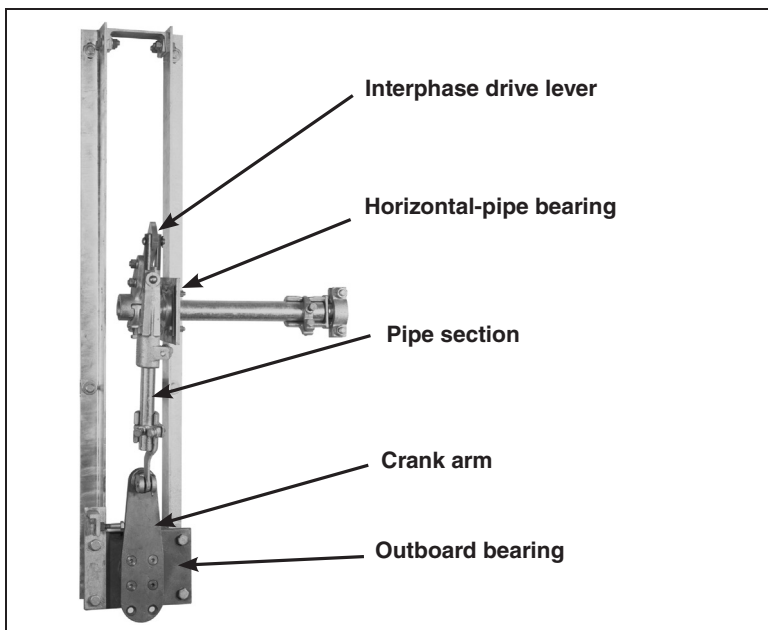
Pipe connecting the outboard bearing to the interphase drive lever.
